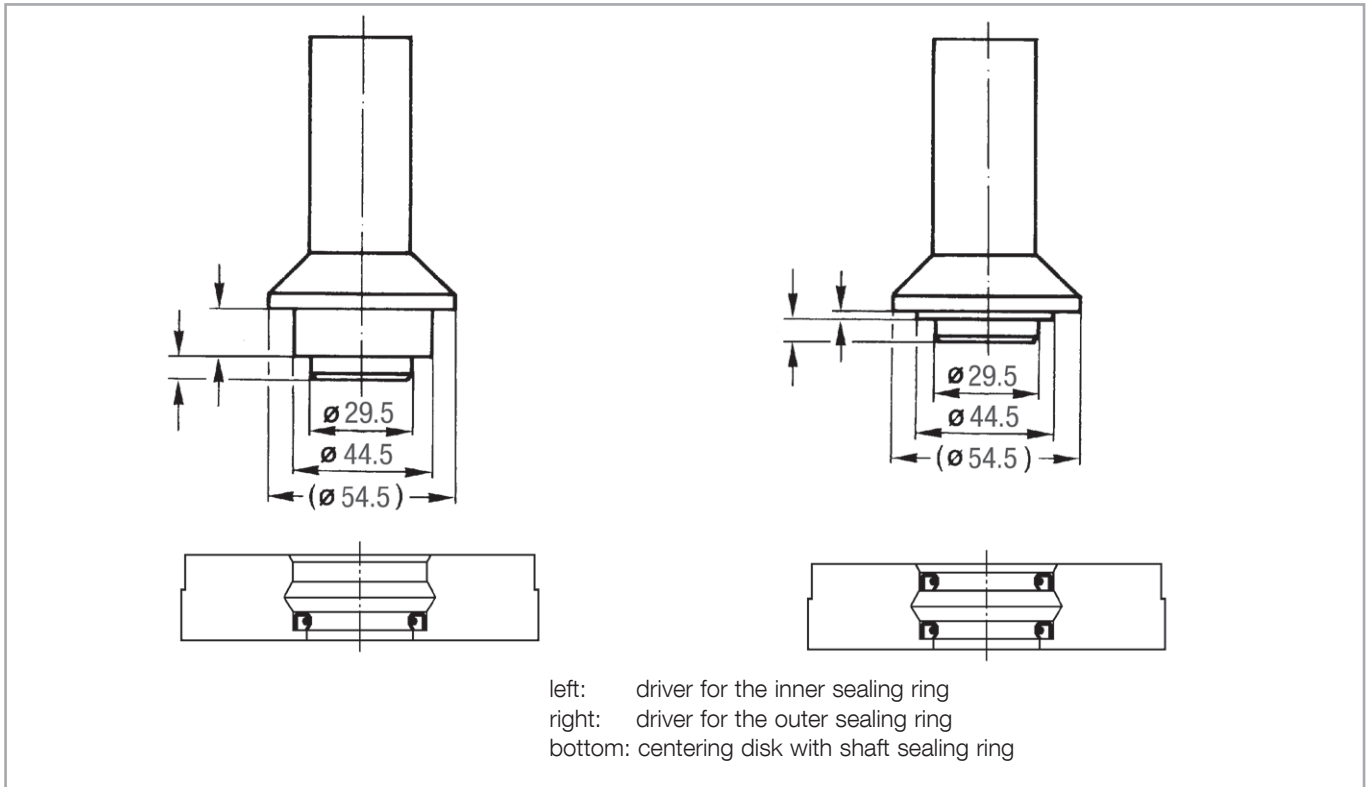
Shaft sealing ring driver (this does not apply to part number 1129646)
